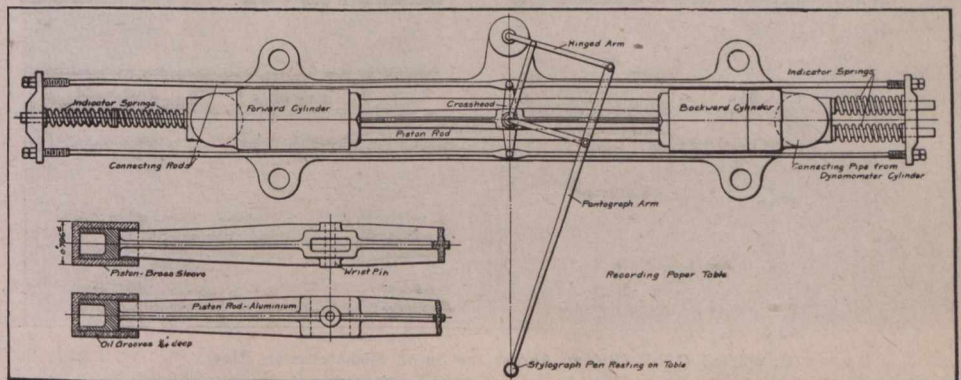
Indicating Oil Cylinders with Pantograph Mechanism.
